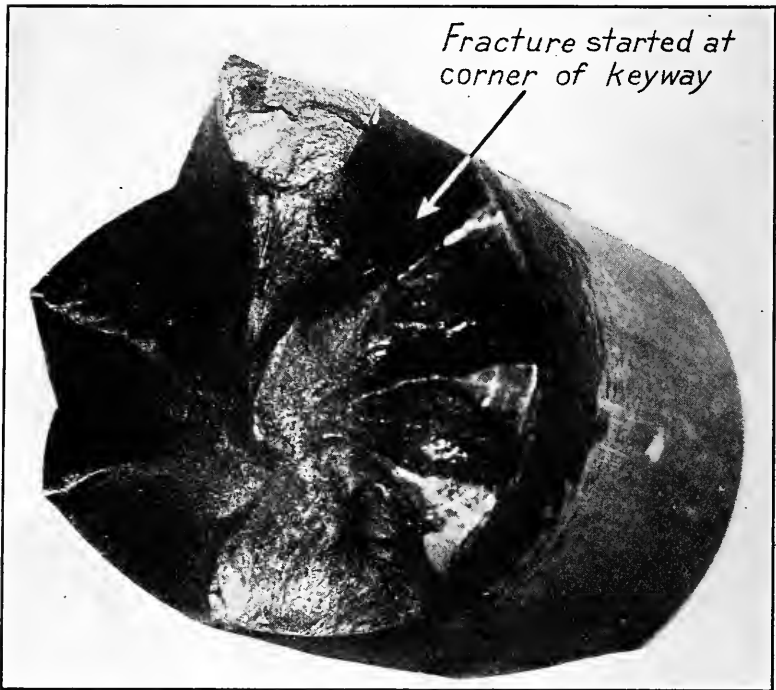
Fatigue fracture of shaft in service under repeated torsion.
